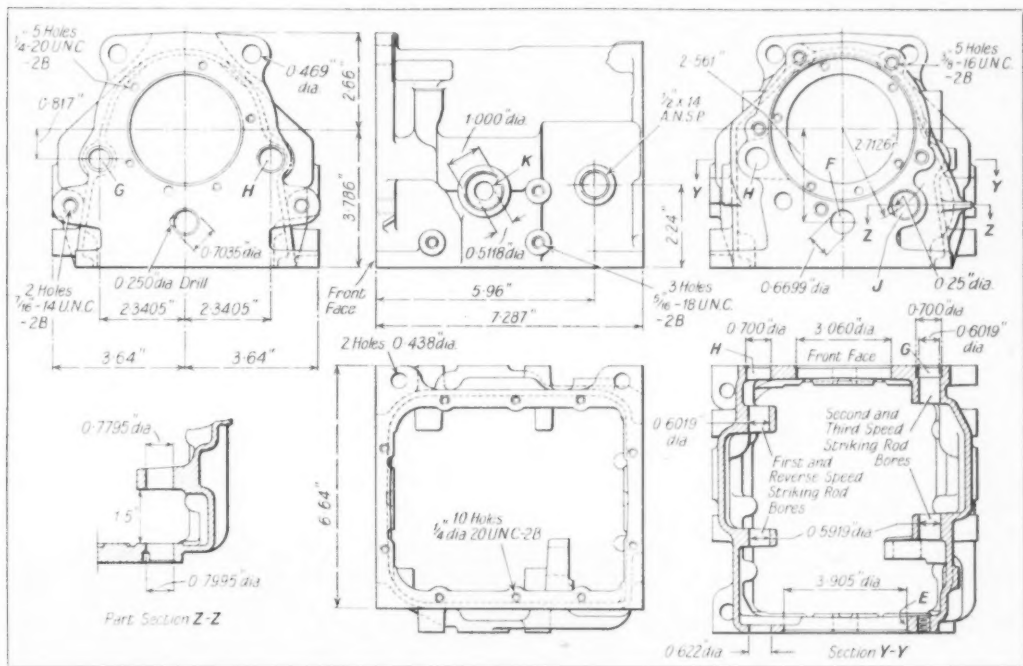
Details of the Machined Gearbox Casting. On the Snyder Transfer Machine the Casting is Turned so that the Rear Face is Successively Leading, at the Right, and Facing Upwards
